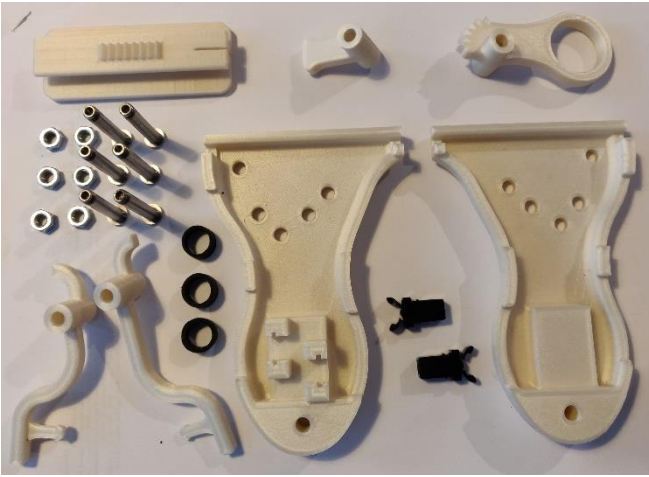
The 3D-printed handle parts (white) with the nuts and machined screws (silver), and the lock catches and rubber rings (black).
